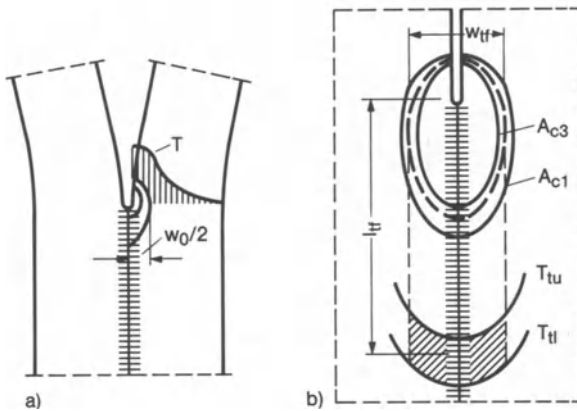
Transverse shrinkage following transverse expansion, phases 1 and 2, for butt weld (first layer) between thicker plates, schematic representation; after Satoh et al. [266, 267, 297]
